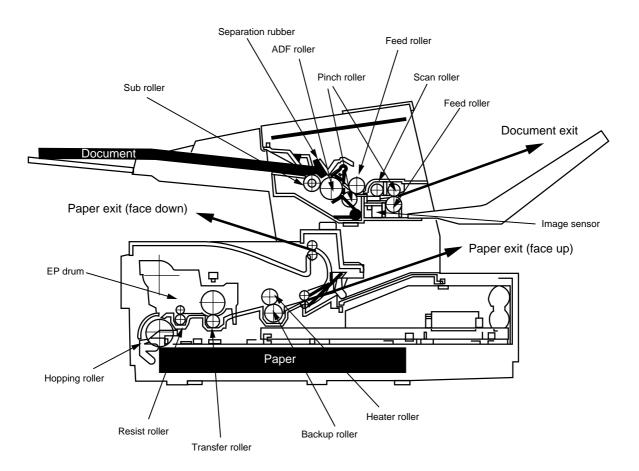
Overall Dimension and Mechanical Structure 1/2
